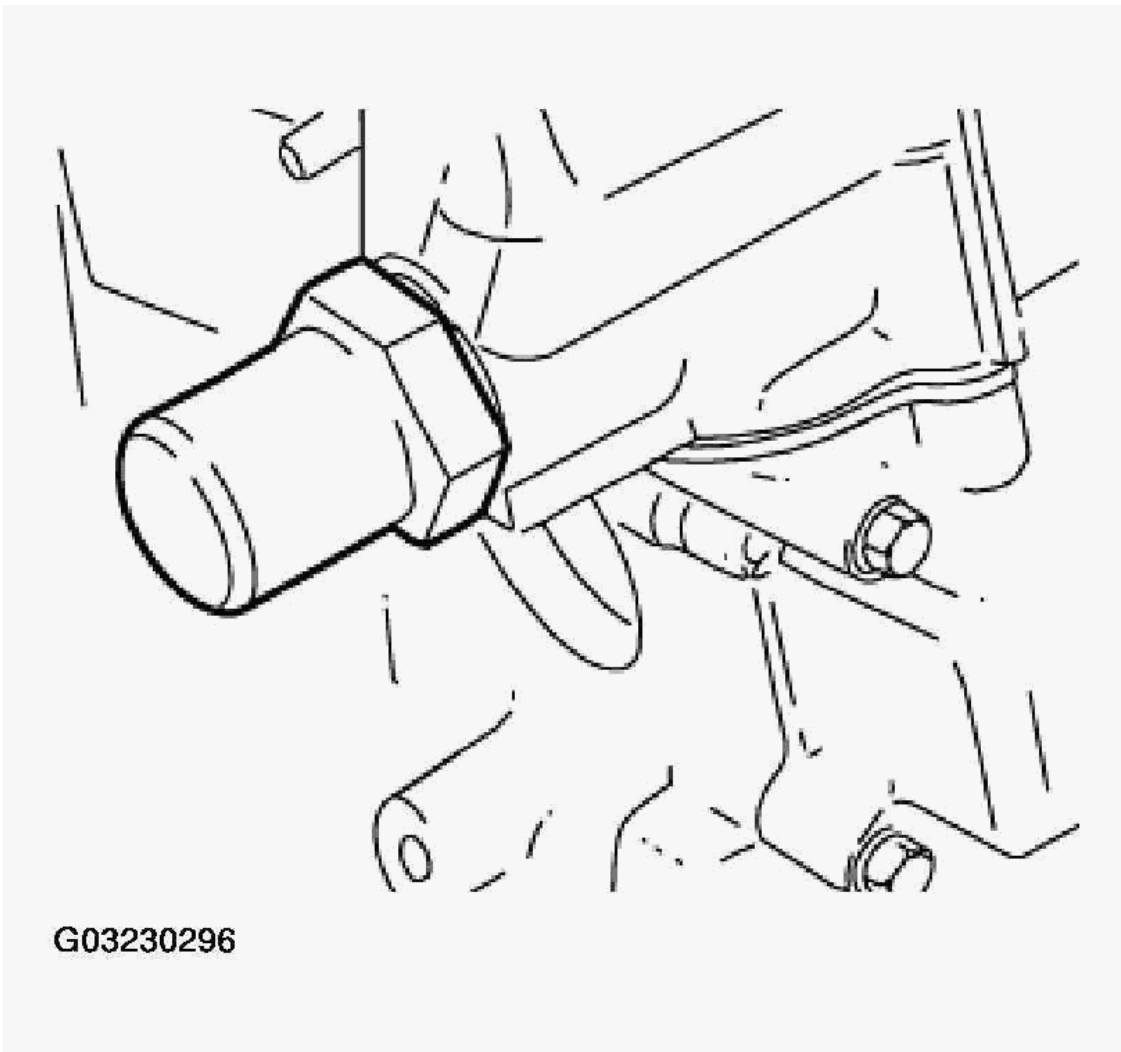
Removing Cylinder For Chain Tensioning Piston
